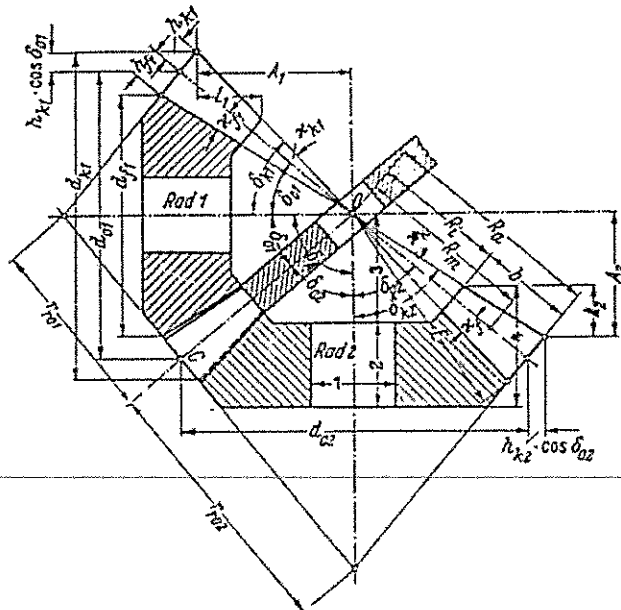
/12. Bevel gear pair with crown wheel indicating the main and secondary dimensions. The dimensions 1 to 4 are used for the manufacture and alignment of wheel bodies according to Trier [21/16].
